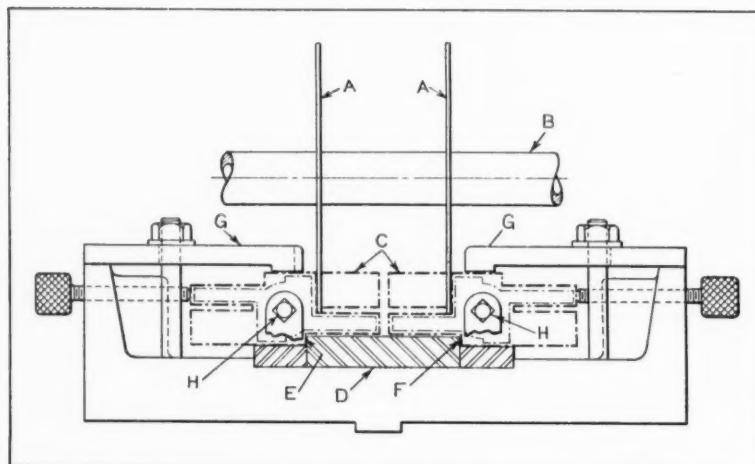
Fixture and Milling Cutters Used in Removing Corner-sections from Bars
